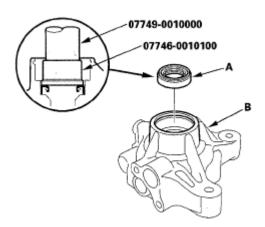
Installing Ball Bearing Courtesy of AMERICAN HONDA MOTOR CO., INC.
